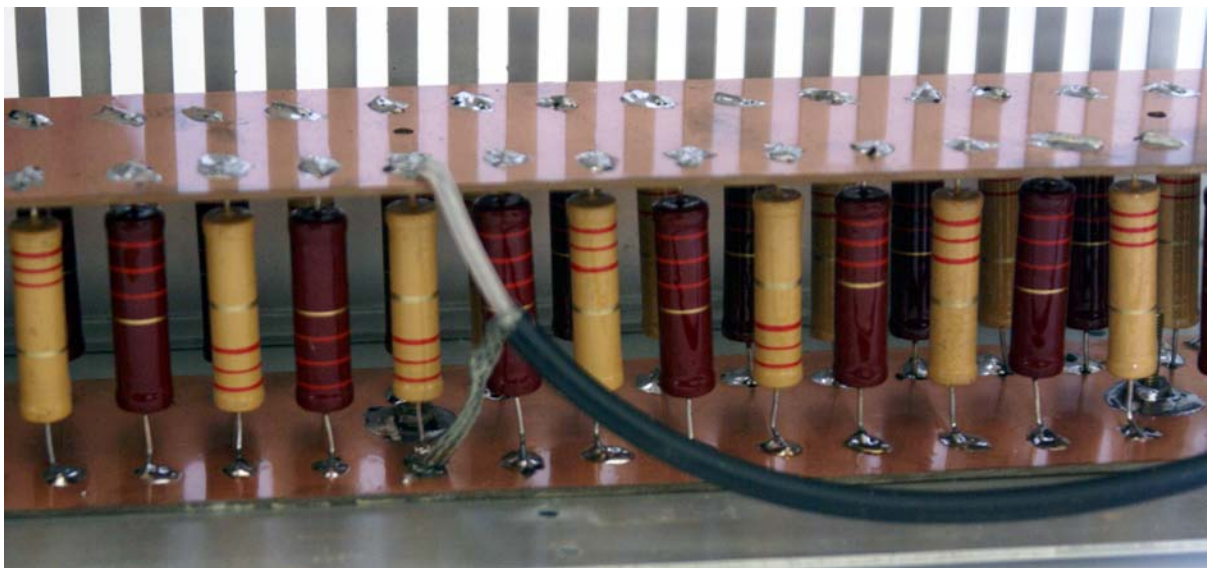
View of resistors and coax mounting in wattmeter element. Soldering details can be seen.
